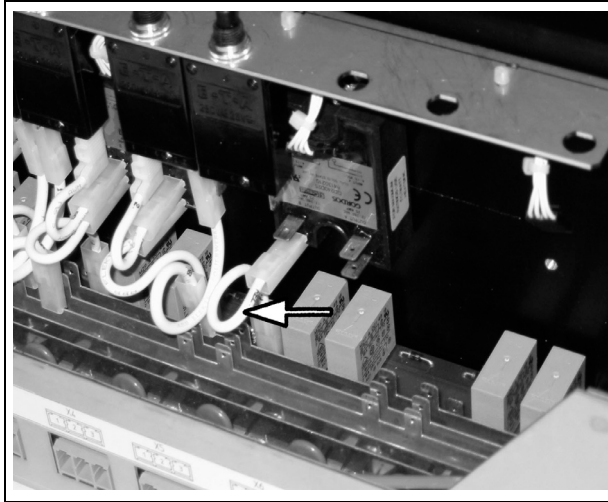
Wiring on the Flat Plug Connection of Printed Circuit Board and Load Relay
